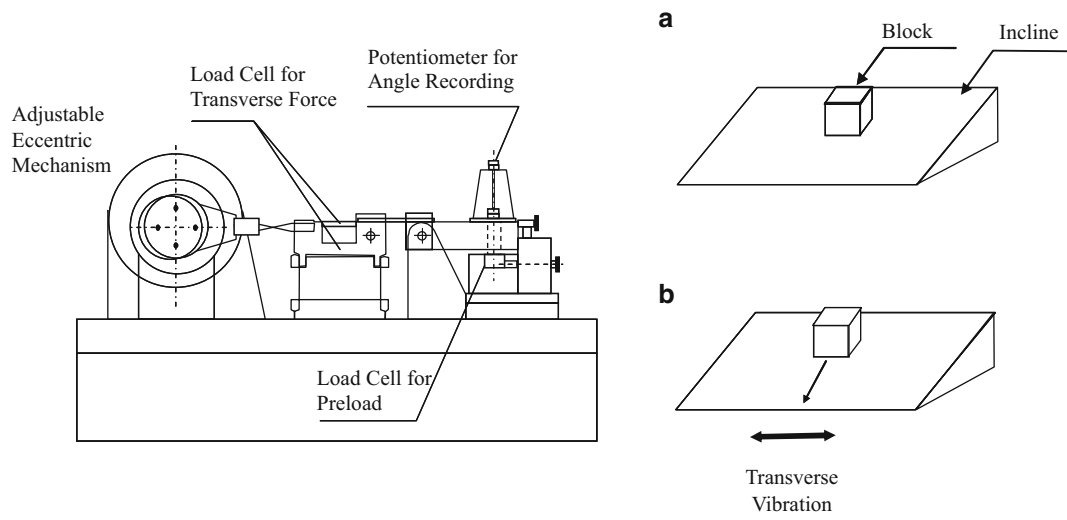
Junker machine for self-loosening test; schematic of the block slippage due to vibration
